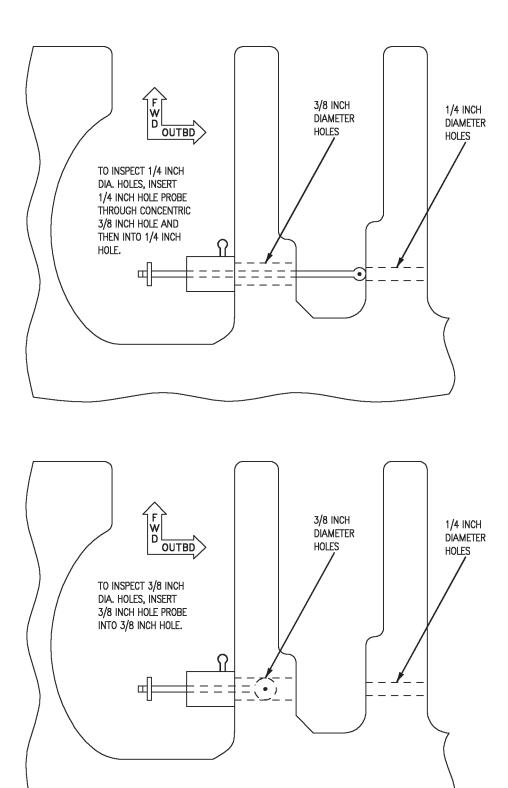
Inspection Areas; 1/4 and 3/8 Inch Diameter Holes Supporting Bolts Inside Roller Bearings (Sheet 1)
